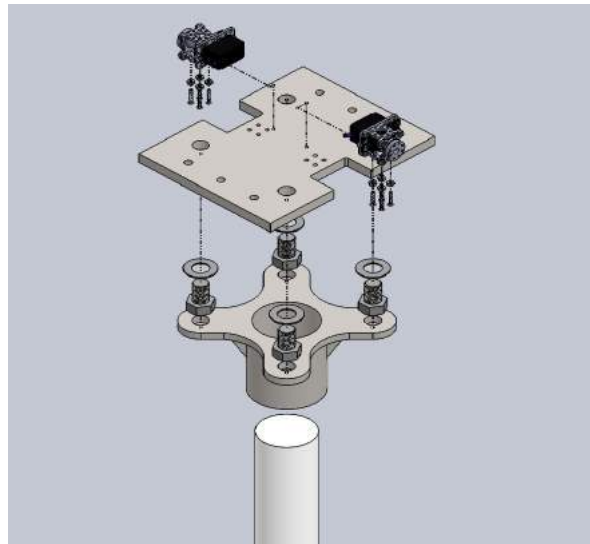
Base Plate and Rod Attachment of the Torso Assembly
